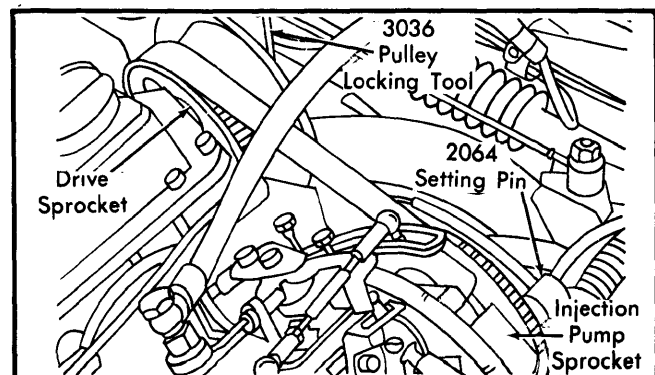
Locking Injection and Vacuum Pump Pulleys (Audi)
